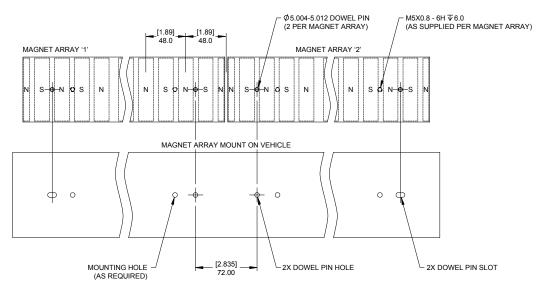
Mounting Two Covered Magnet Arrays End-To-End
